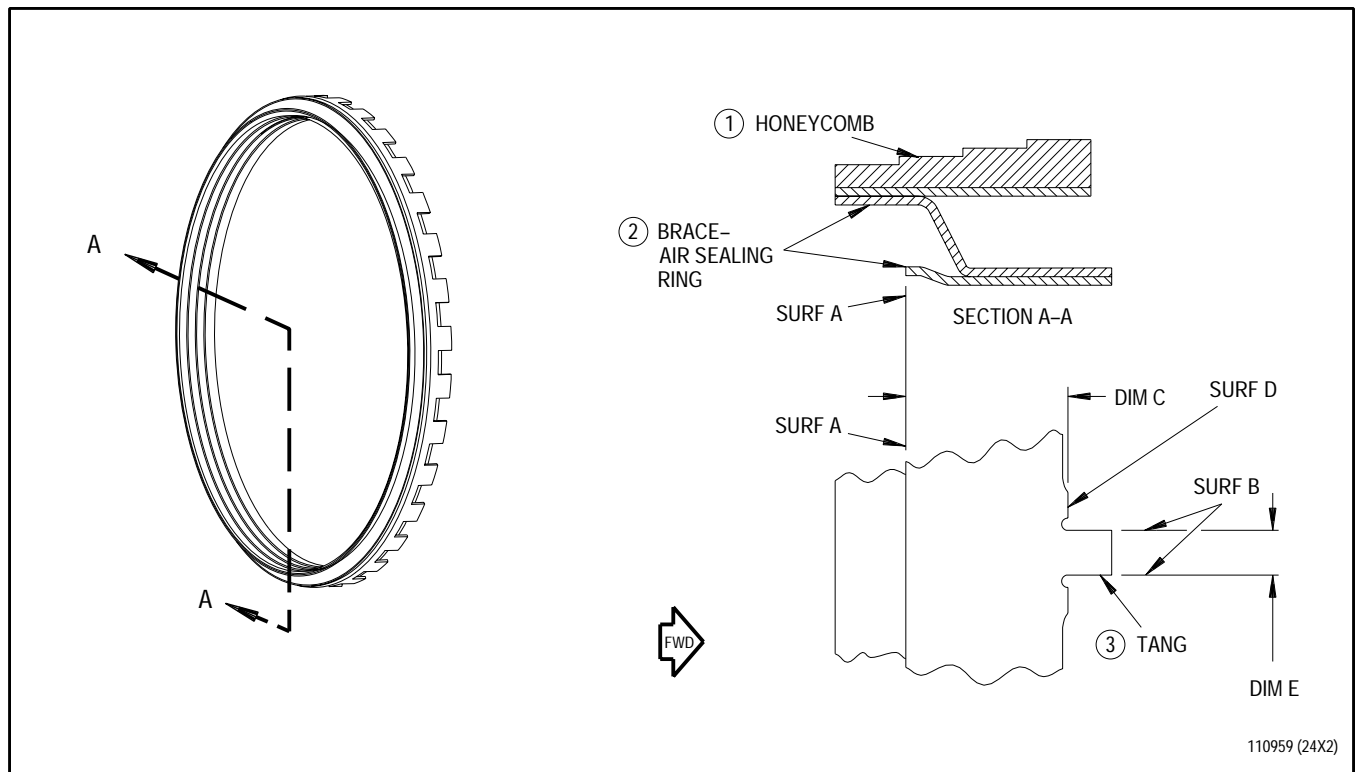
Second Stage Turbine Air Sealing Ring Assembly - Inspection
